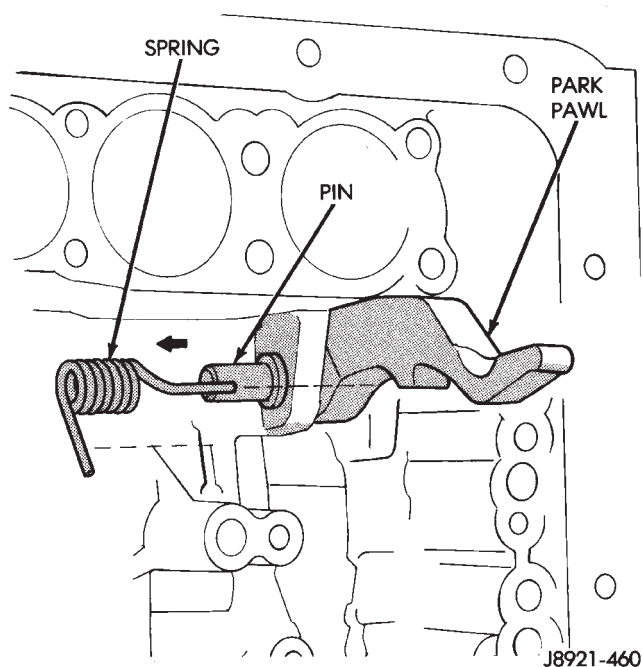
Removing/Installing Park Pawl, Pin And Spring
